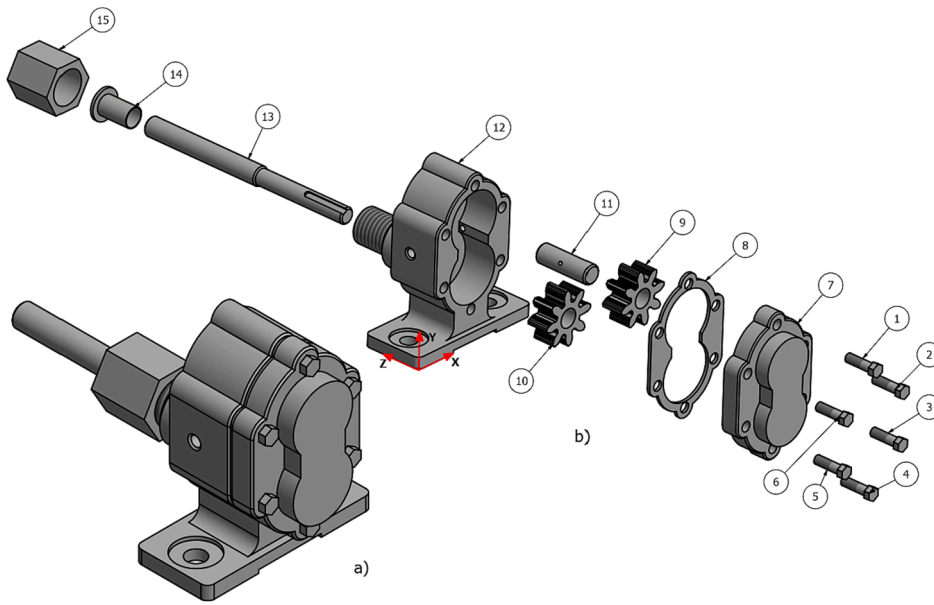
Gear pump A: (a) assembled view; (b) exploded view. Source: Liu et al. (2018a).
